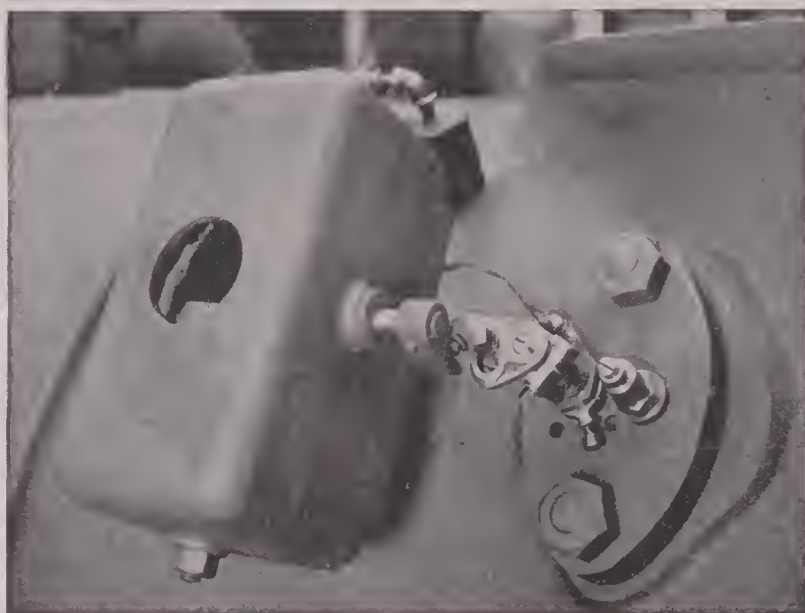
Igniter Block; Westinghouse Horizontal Engine.
